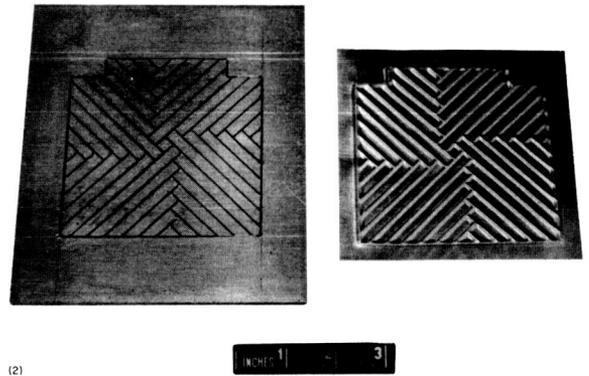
shows the actual embossing die and a piece of embossed aluminum.
